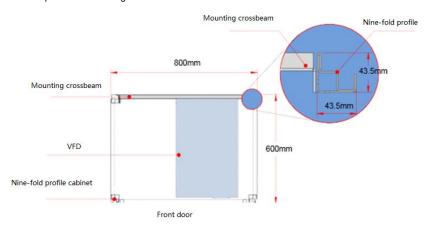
Top view of mounting a GD270 280-500kW VFD in a cabinet
